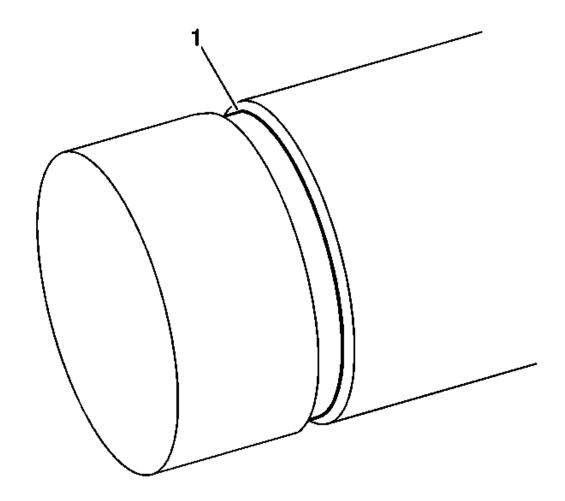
Inspecting Crankshaft Balancer Sealing Area For Grooves Courtesy of GENERAL MOTORS CORP.
